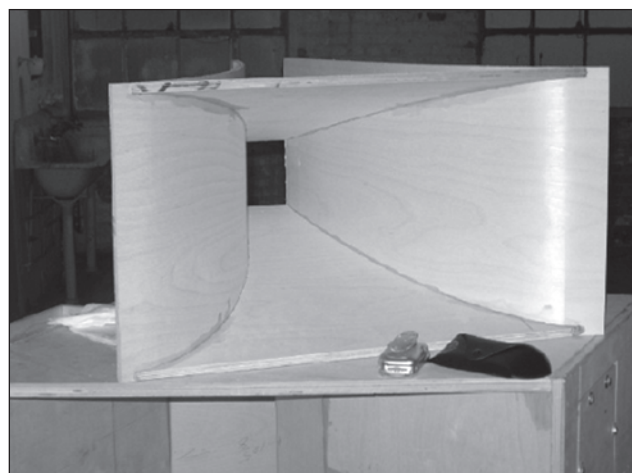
Horn removed from the jig prior to any wood assembly.
